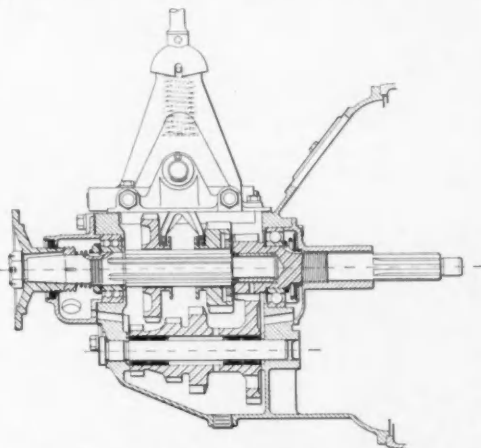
STUDEBAKER DESIGN OF CONVENTIONAL THREE-SPEED GEARSET
